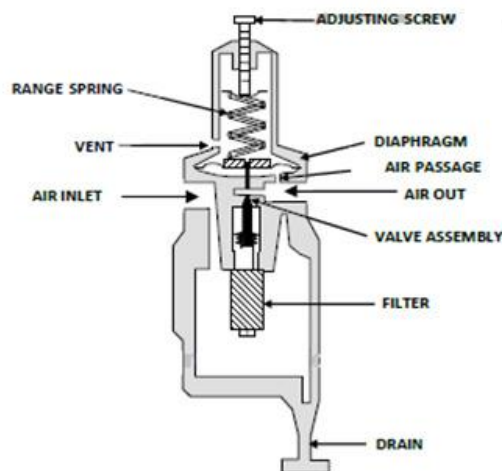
Construction of Pneumatic Air Regulator Valve
